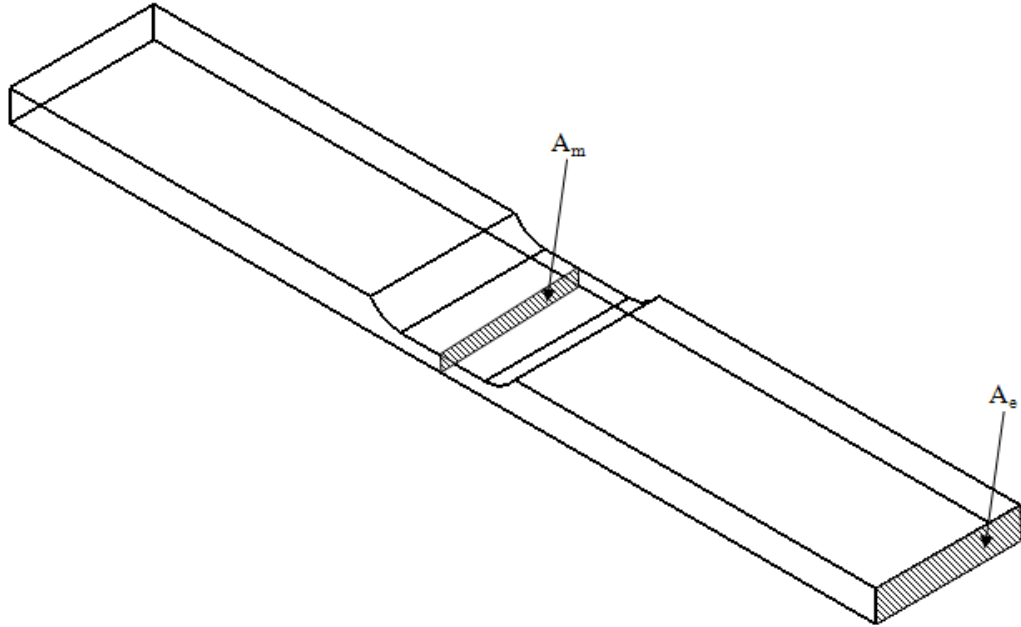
Open Hole in Radius Test Specimen -1 Cross-Sectional Area Cuts
